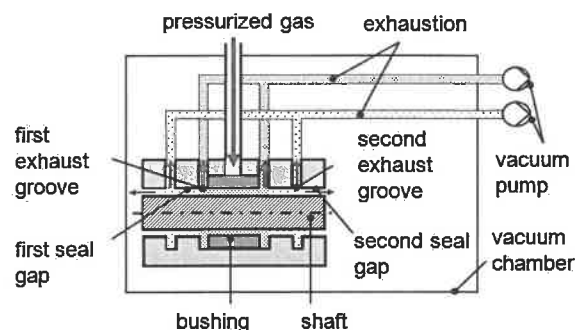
Schematic setup of a vacuum compatible gas bearing guide with two-stage exhaust system.
